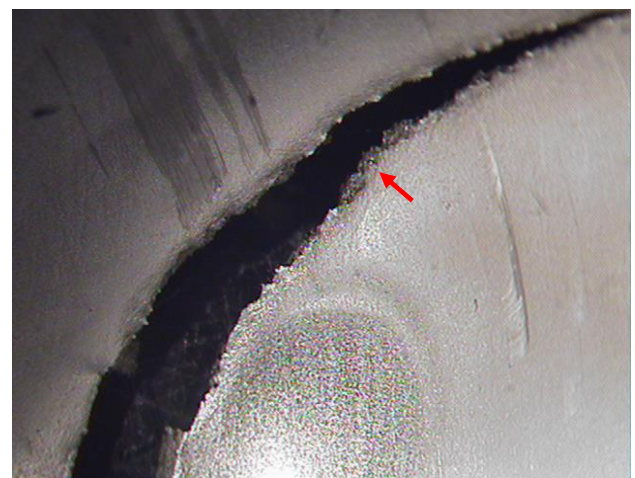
Internal surface of the stamped and cracked component after the second process step. The crack located in the lower radius of the component can be observed
